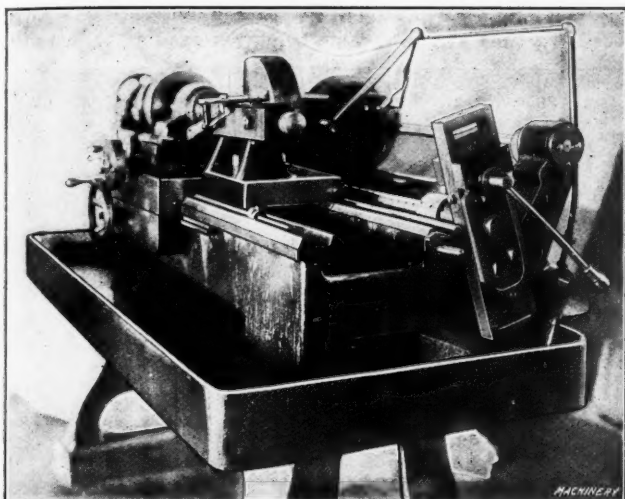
Special Lathe provided with Large Pan for Oil and Chips
